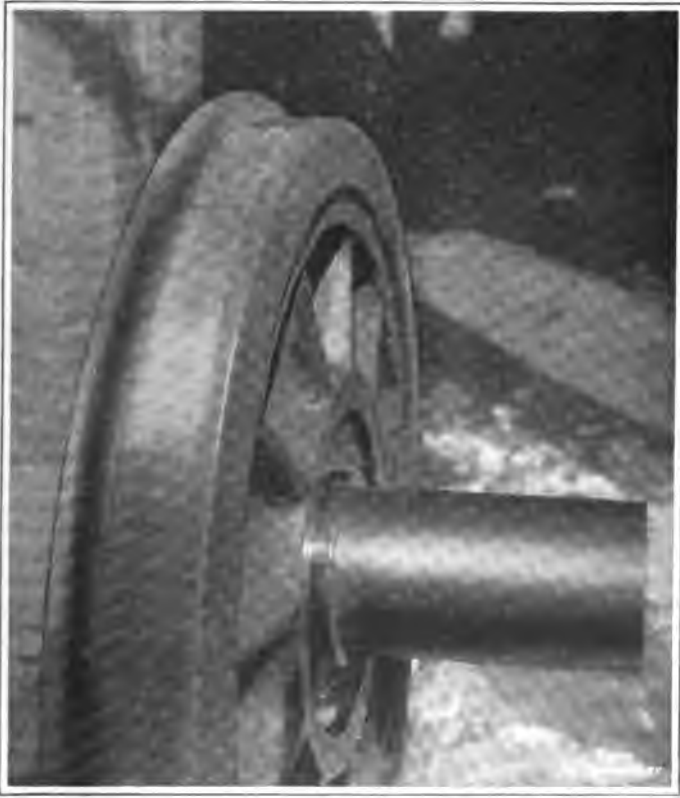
Locomotive Trailer Wheel with Flat Spot Ready for Welding
